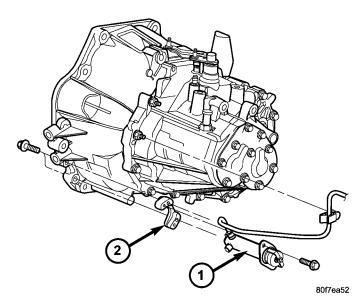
Clutch Slave Cylinder at Transaxle- 2.0/2.4L
